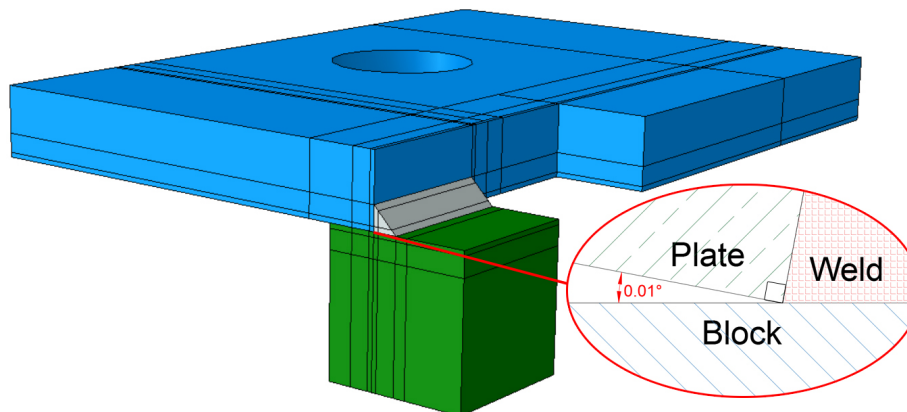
The test specimen part with longitudinal fillet welds
